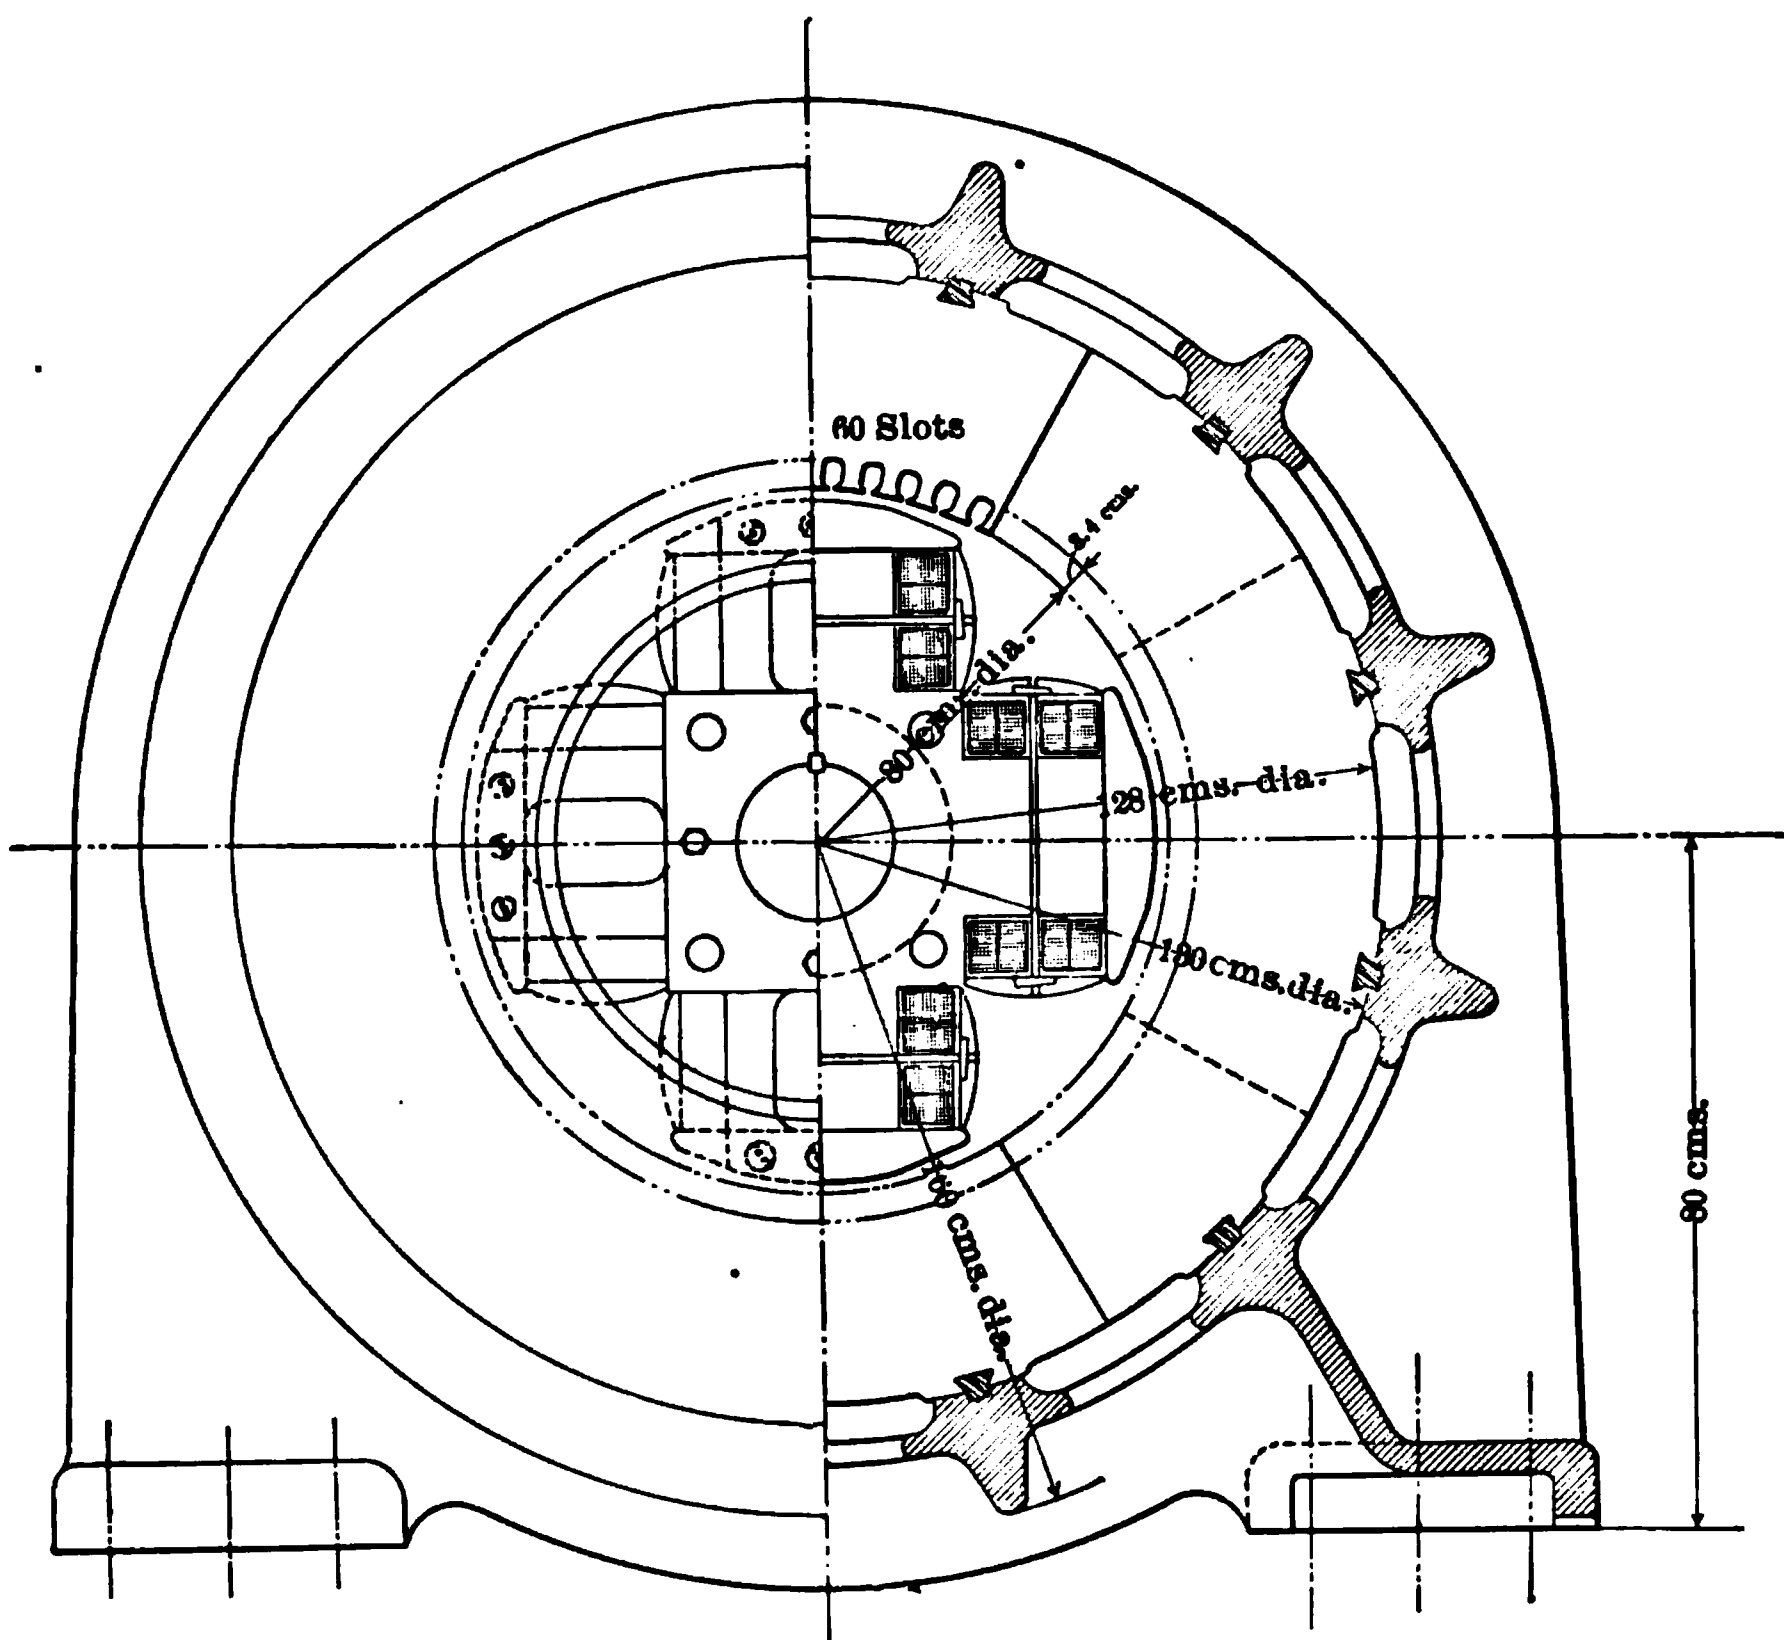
A. — Outline drawing of assembly of 650 kva. 1500 r.p.m. 50-cycle 4-pole 3-phase alternating current generator.
